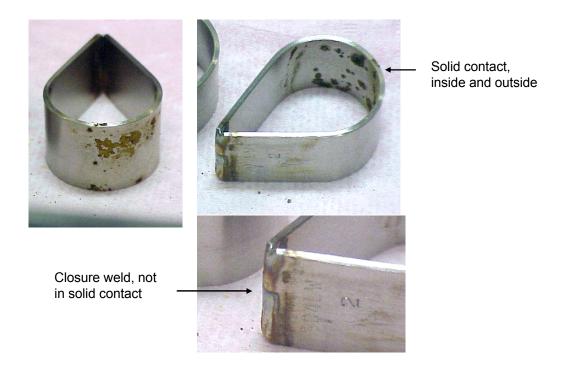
Container 4b-1 teardrop coupon 304L - 02 showing pitting inside and outside in metal in solid contact; no evidence of cracking; staining near closure weld.
